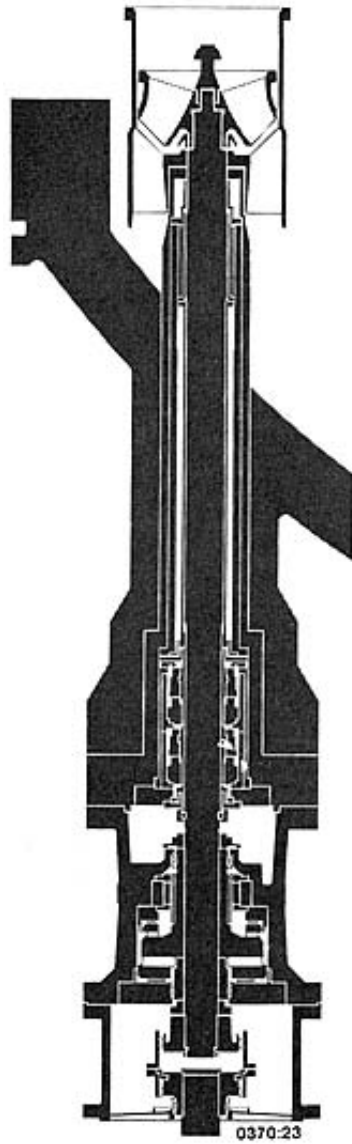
Insert pump with wet rotor motor for boiling water reactors
